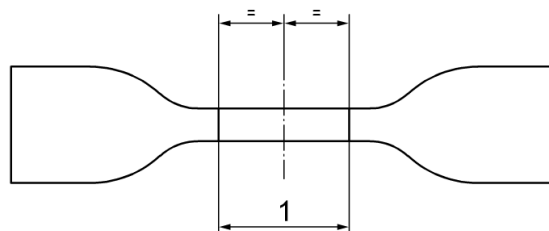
Shape of tensile testing specimens (Type 1)⁴, gauge length 25 mm.
